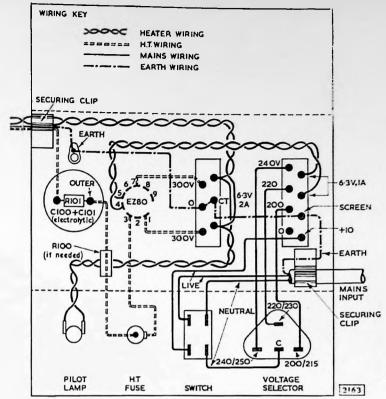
POWER UNIT ASSEMBLY AND WIRING DETAILS
